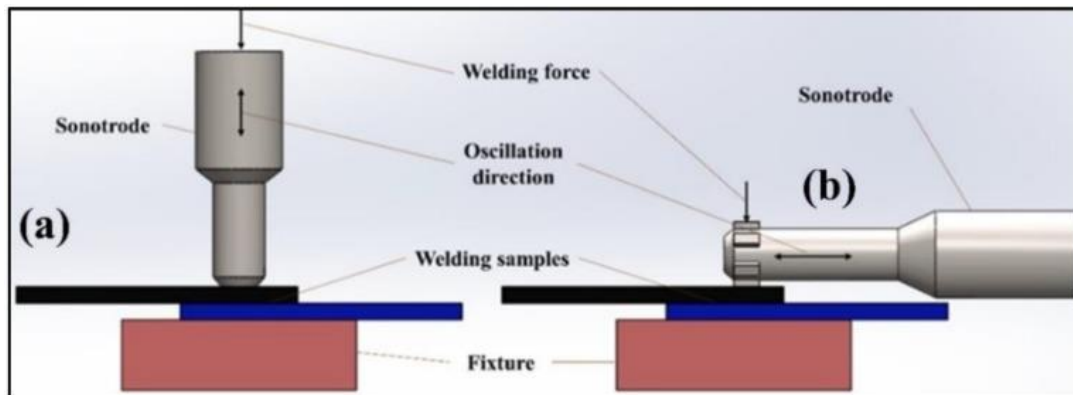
Diagram, showing typical features for (a) ultrasonic plastic welding and (b) ultrasonic metal welding. [34]
